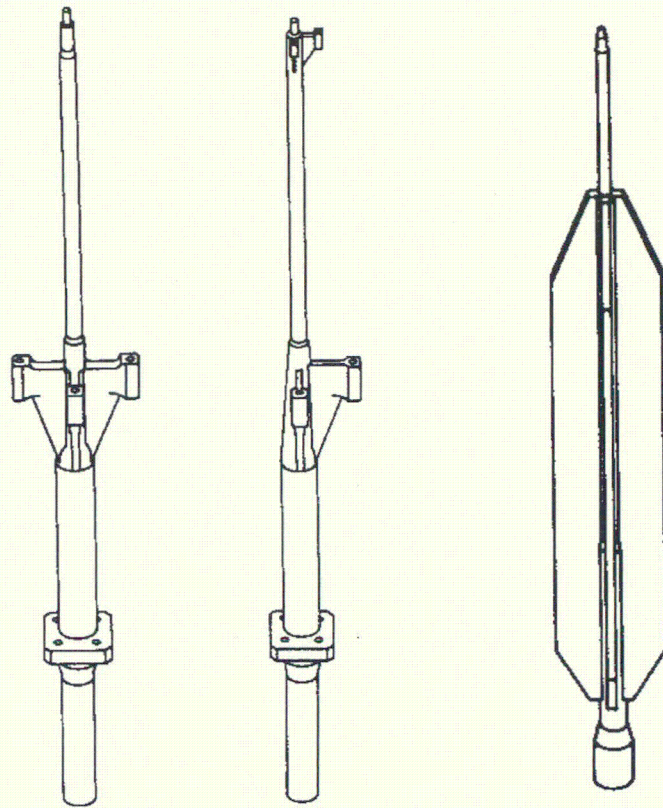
Examples of Bottom-Mounted Instrumentation (BMI) Column Designs
